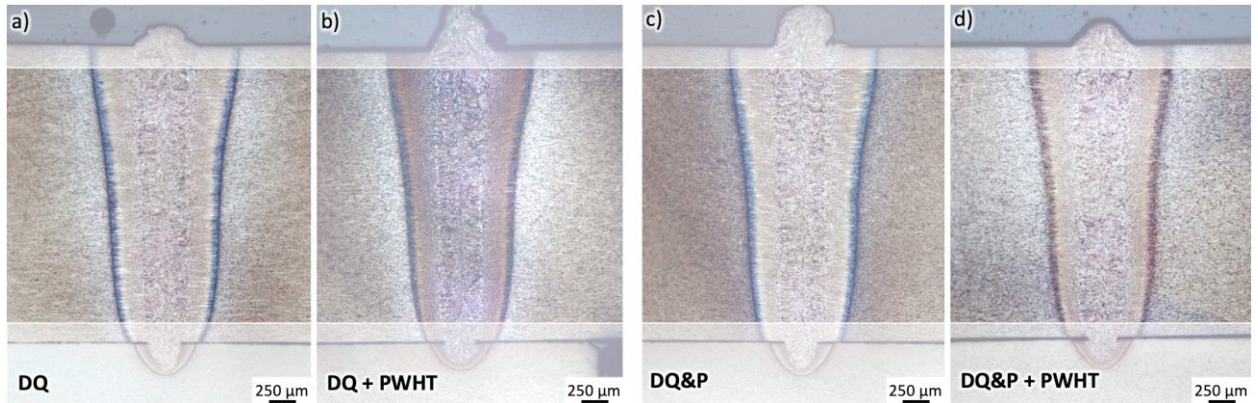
The as-welded cross sections for: a) DQ, b) DQ + PWHT, c) DQ&P, and d) DQ&P + PWHT (PWHT = post-weld heat treatment).
